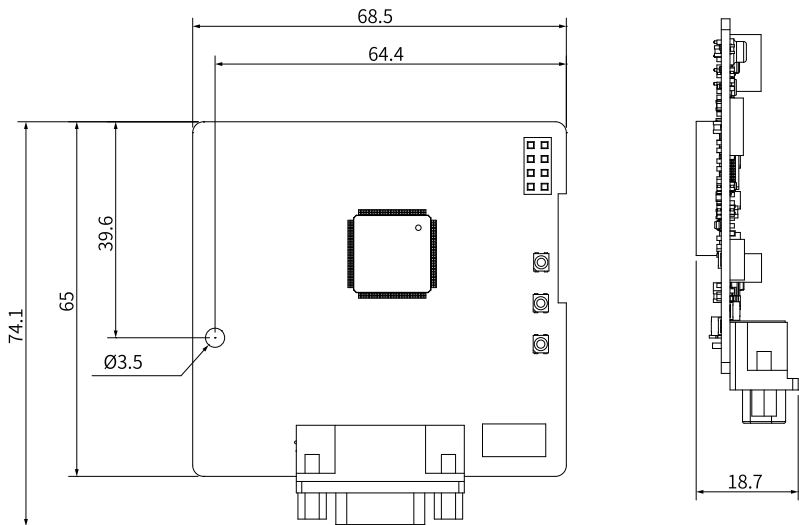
MD580-SI-DP1 card dimensions (unit: mm)
